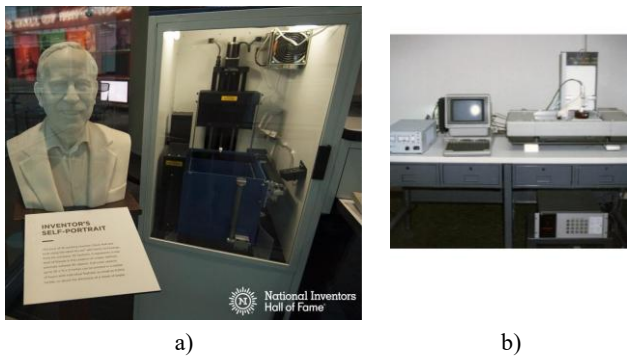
a) View of the *SLA* Additive manufacturing method and its founder, b) worlds first commercial released *SLA* machine (printer) [6]
